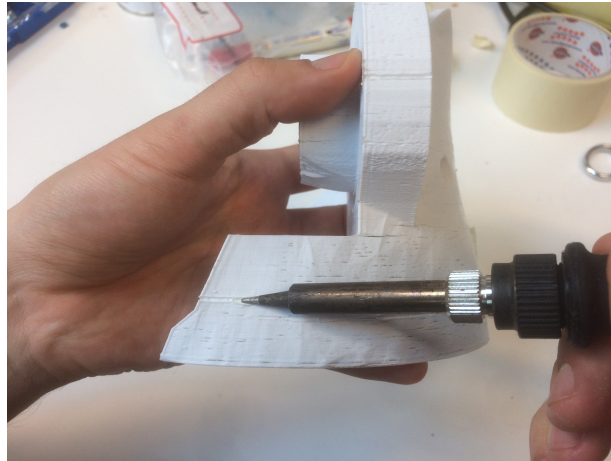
Repairing a small crack with a soldering machine
